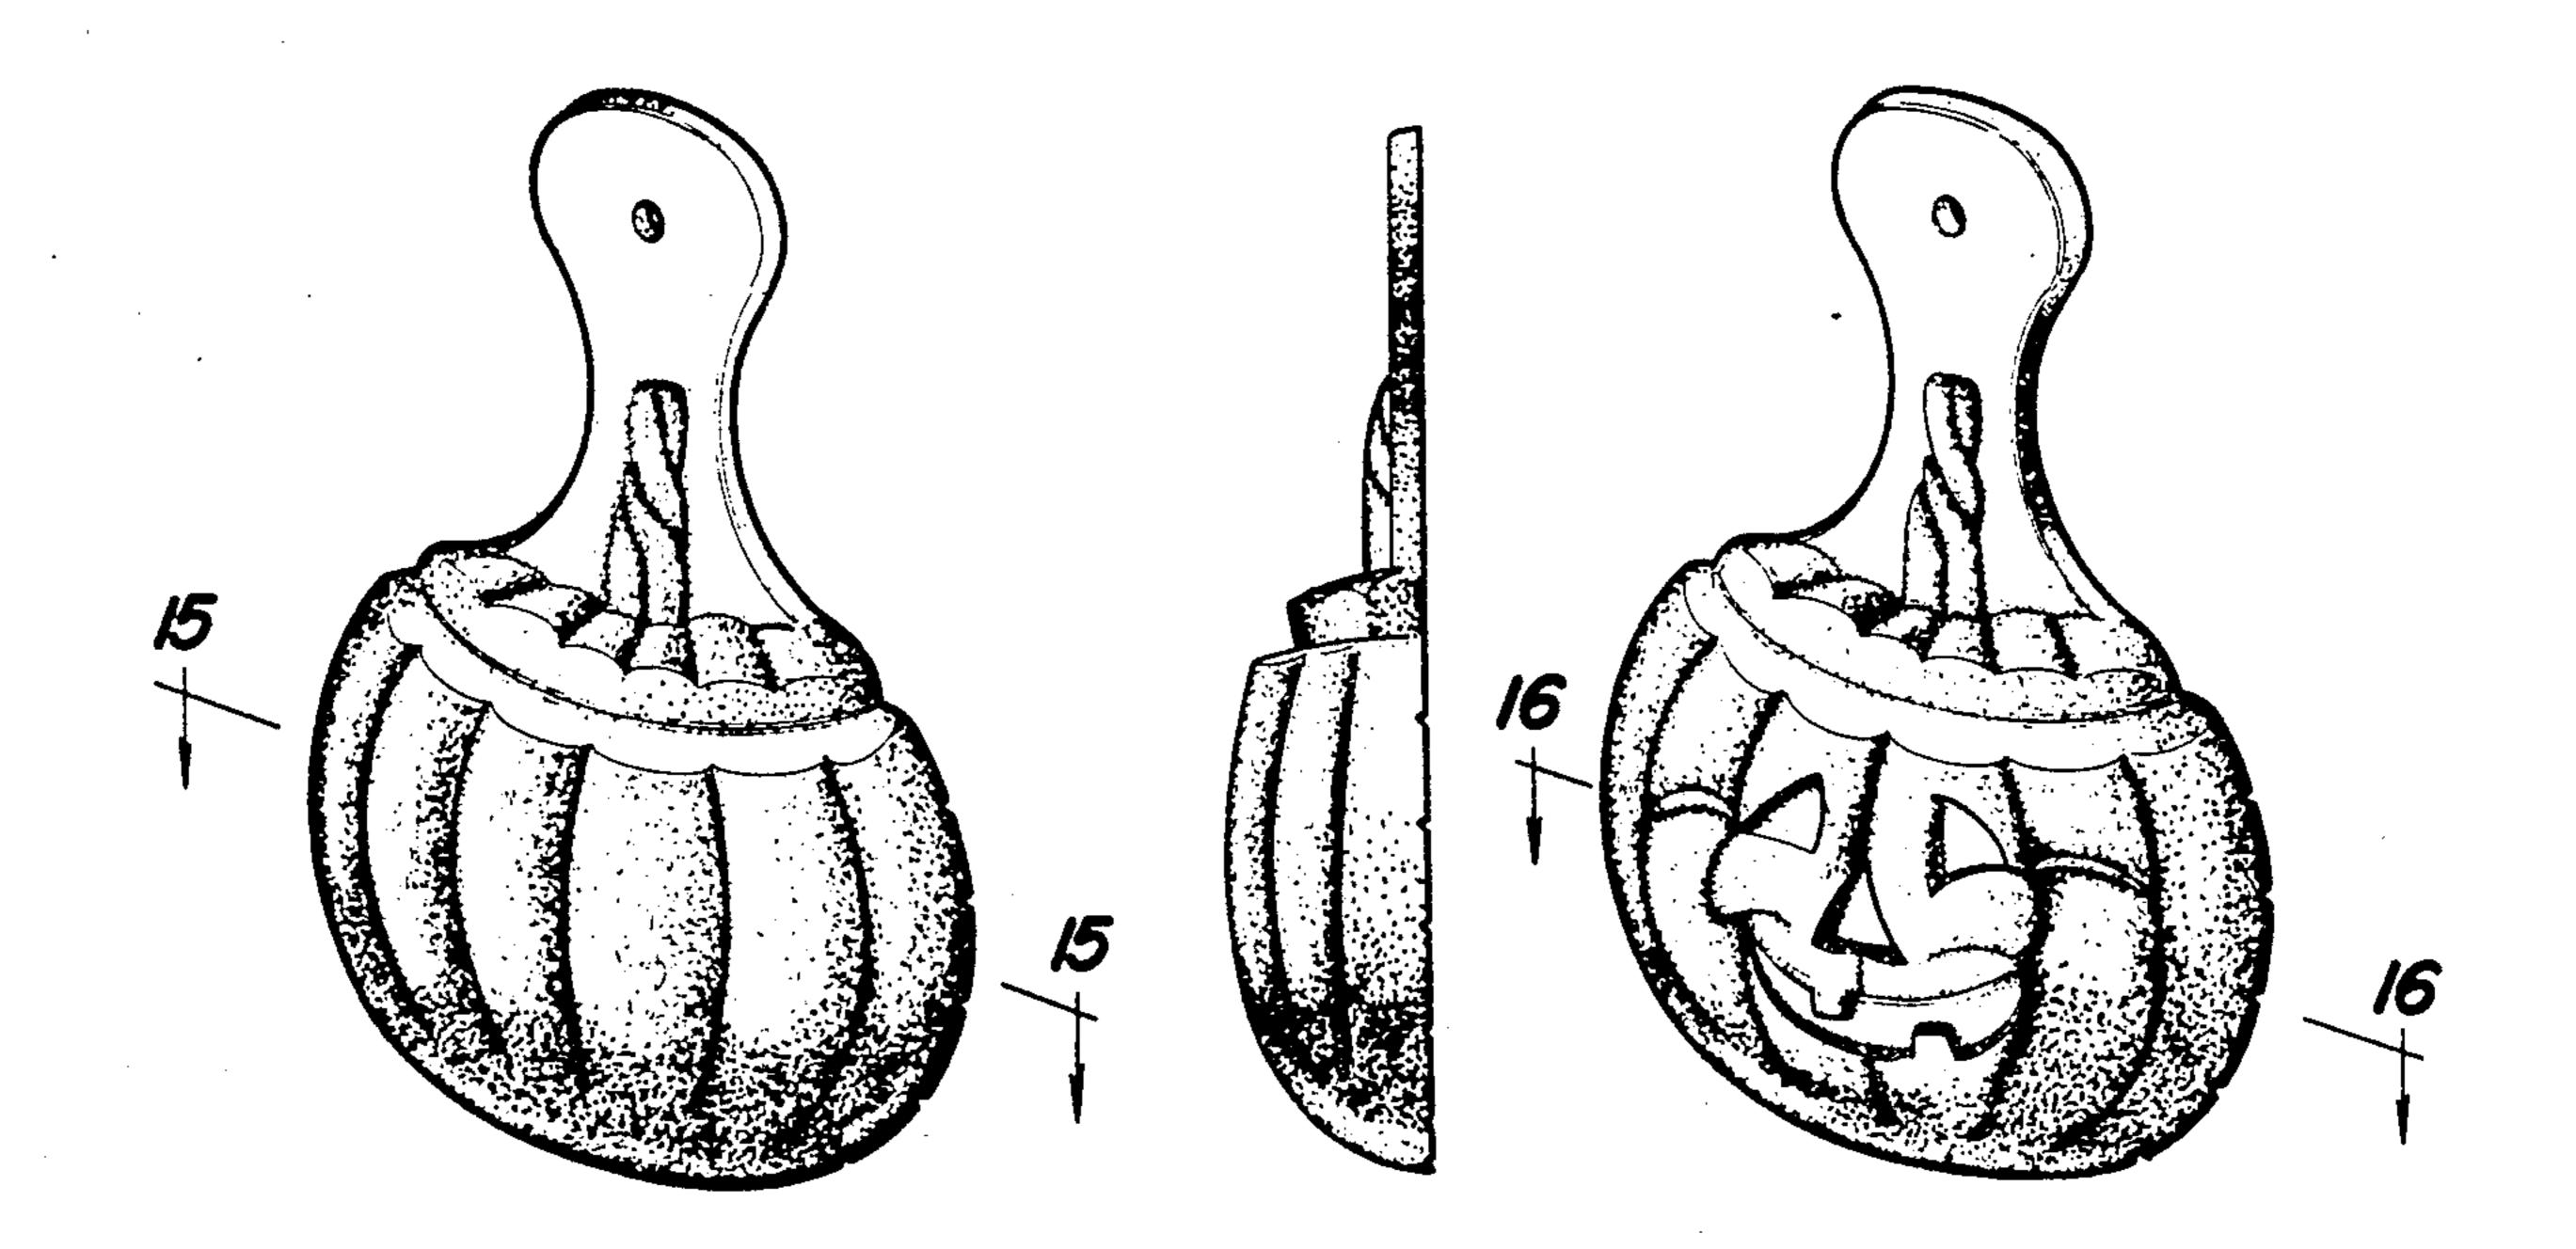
is a right side elevational view of that shown in FIG. 8;
